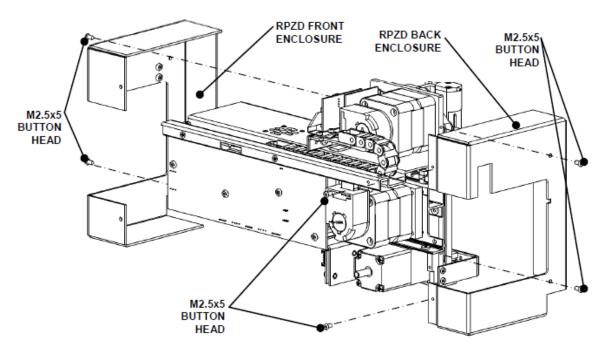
The Reagent Pipettor Z Drive Front Enclosure and the Reagent Pipettor Z Drive Back Enclosure
